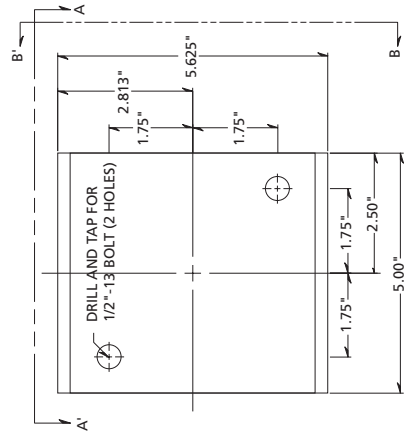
" x 6" RAIL WITH WELDED PLUG SIDE ELEVATION Q3
